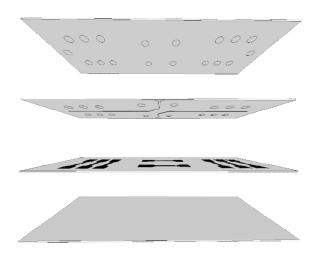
Exploded view of the thruster chip design. Bottom layer is unpatterned, second layer is printed with sensor and heaters, third layer has embossed thrusters and fluid channels, as well as vias for electrical connections. Top layer has vias and gas interfaces. The size of the thruster is 25×10 mm.
